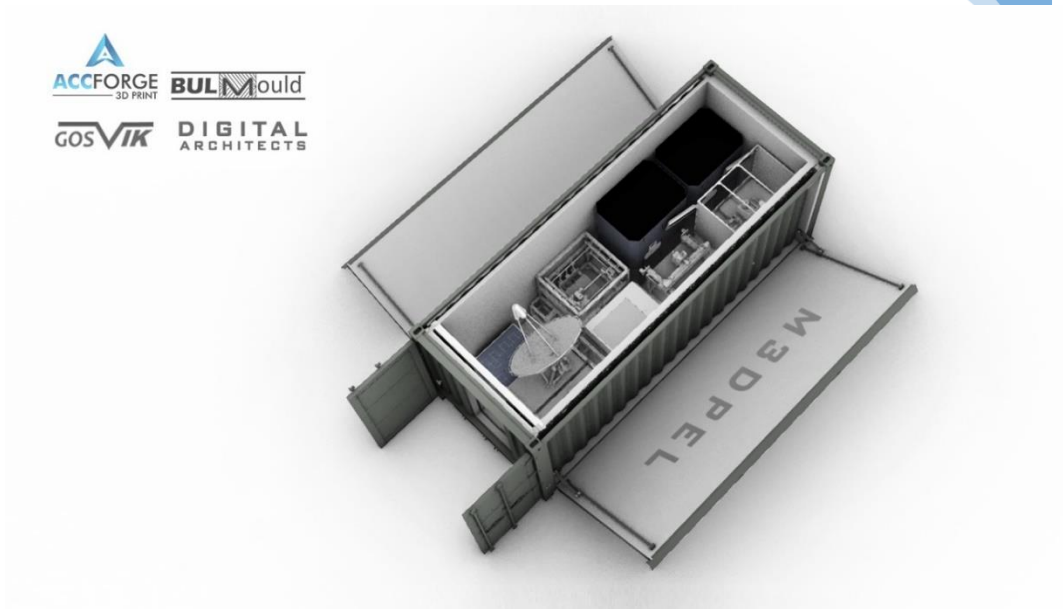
First steps to deploy additional work spaces providing a stable supporting structure and floor area for additional work space. (see Figure 3).
